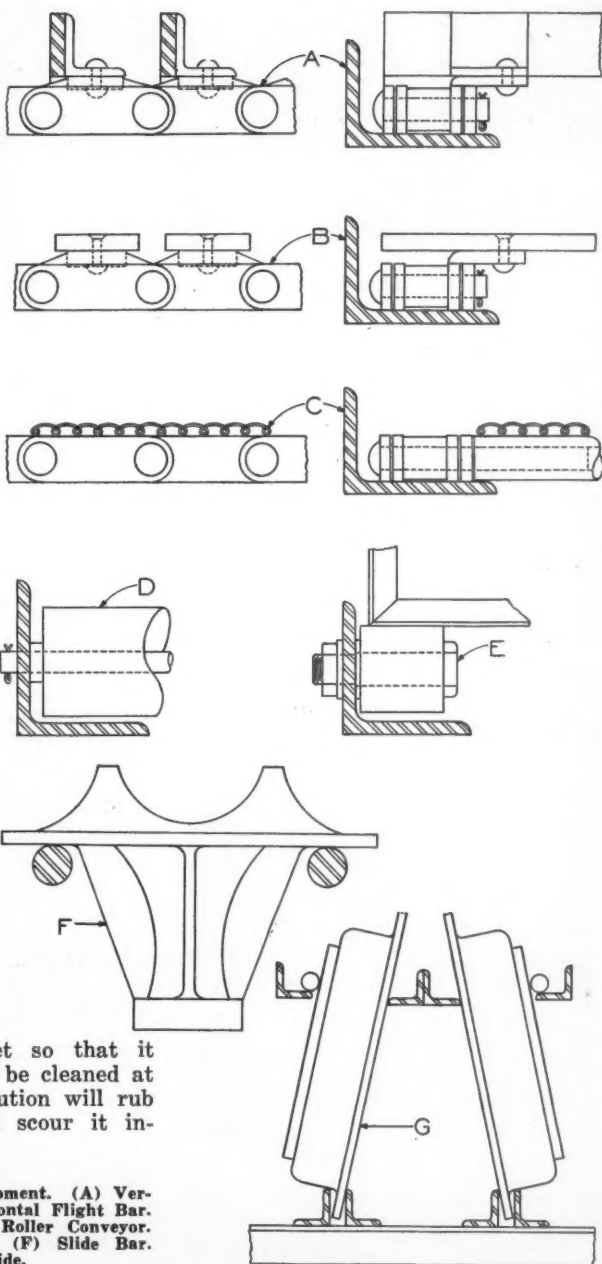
Parts-Handling Equipment. (A) Vertical Flight Bar. (B) Horizontal Flight Bar. (C) Wire Mesh Belt. (D) Roller Conveyor. (E) Slide Bar. (F) Stub Roller Conveyor. (G) Roller Guide.
